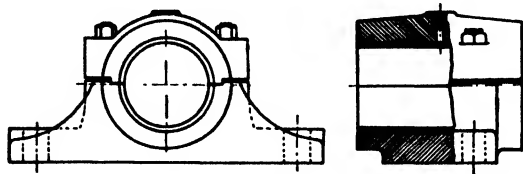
Babbitt-lined Split Pillow Block or Bearing.
